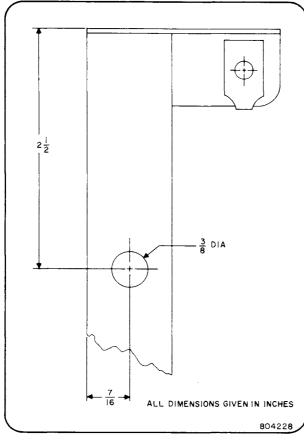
AJ. Model 33 Teletypewriter Phone Jack Drilling Dimensions
